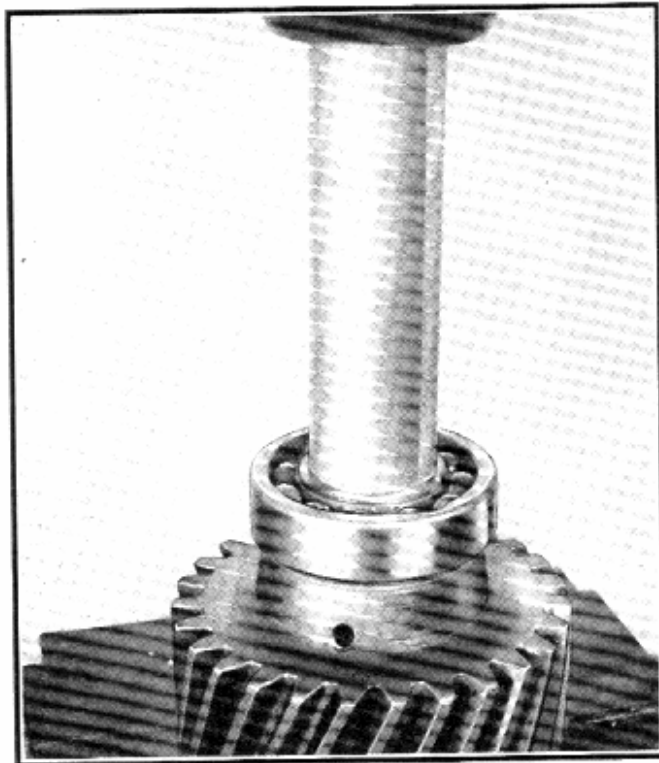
Installing Main Shaft Rear Bearing, Tool No. J-1718
